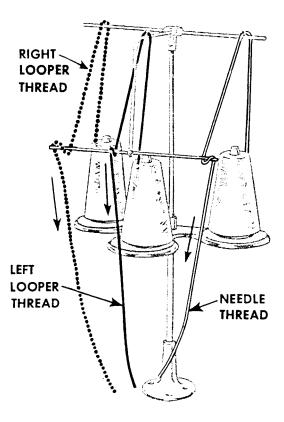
Unwinder 151031 Threaded for Three-Thread Stitch
